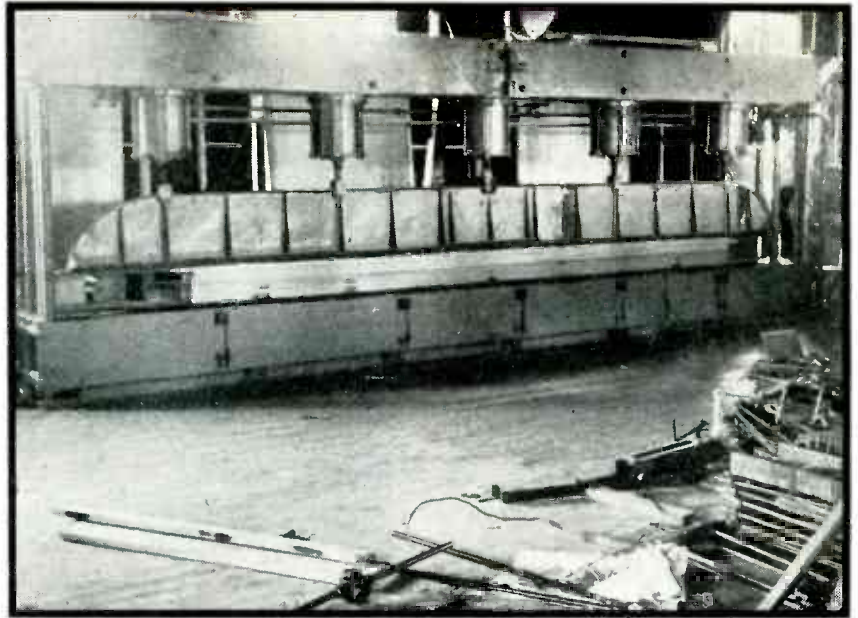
(right)—Large press used in gluing up the 6 in. x 6 in. x 16½-ft blocks from which multi-laminar spars are sawed
